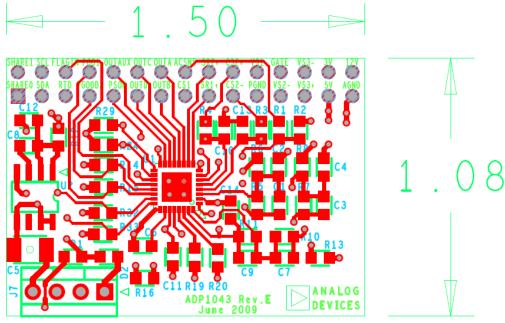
Figure 54 - Figure 53 - Top Layer, dimensions in inches
